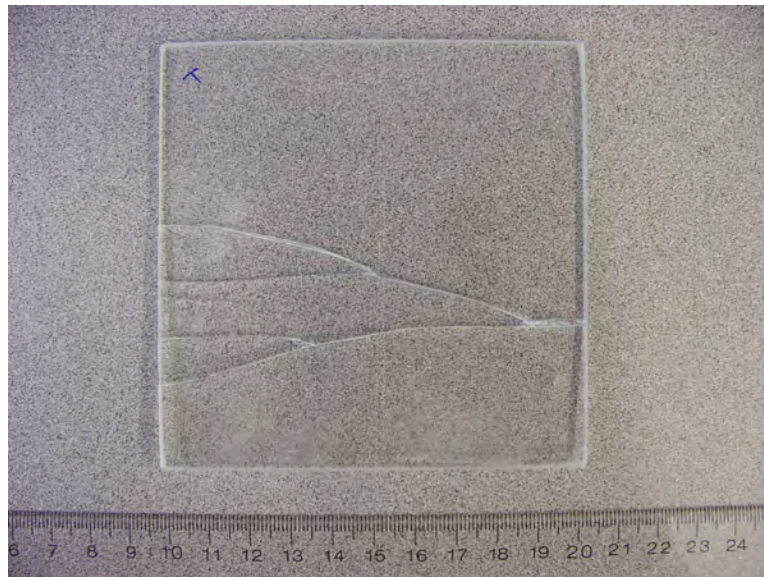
Example of 100-mm square tile fractured in 4-pt bending. Failure initiation occurred at the right edge.
